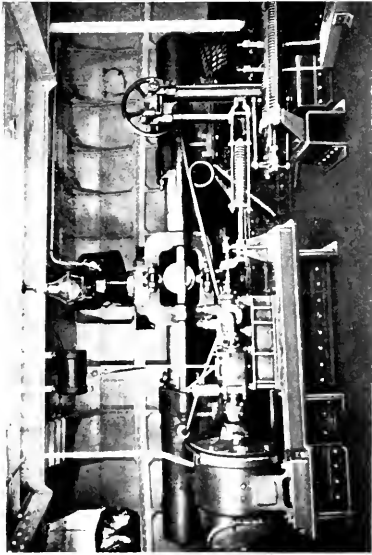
Electro-hydraulic Steering Gear Driven by 6 h.p. Direct-current Marine Motor
